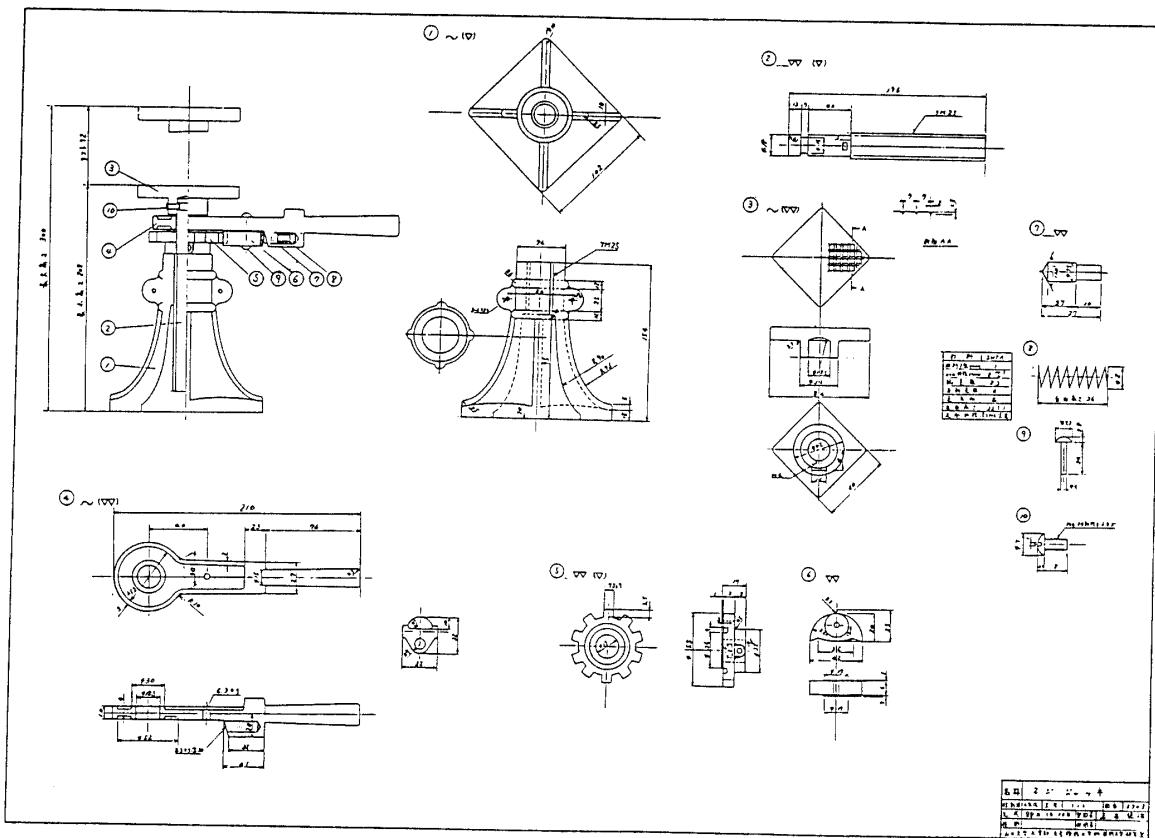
(a) Manual drafting of a screw jack (from a sketch of it).
